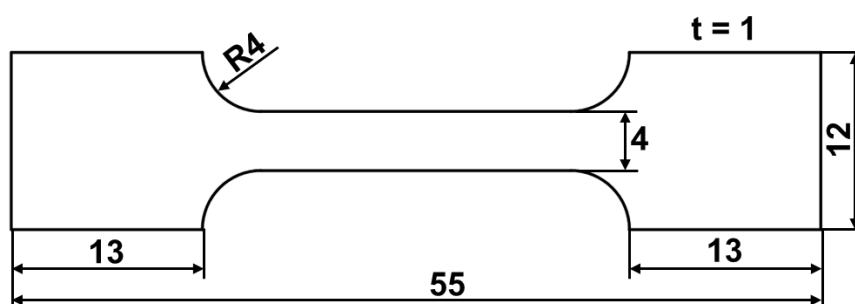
Tensile specimen geometry (all dimensions in mm).
